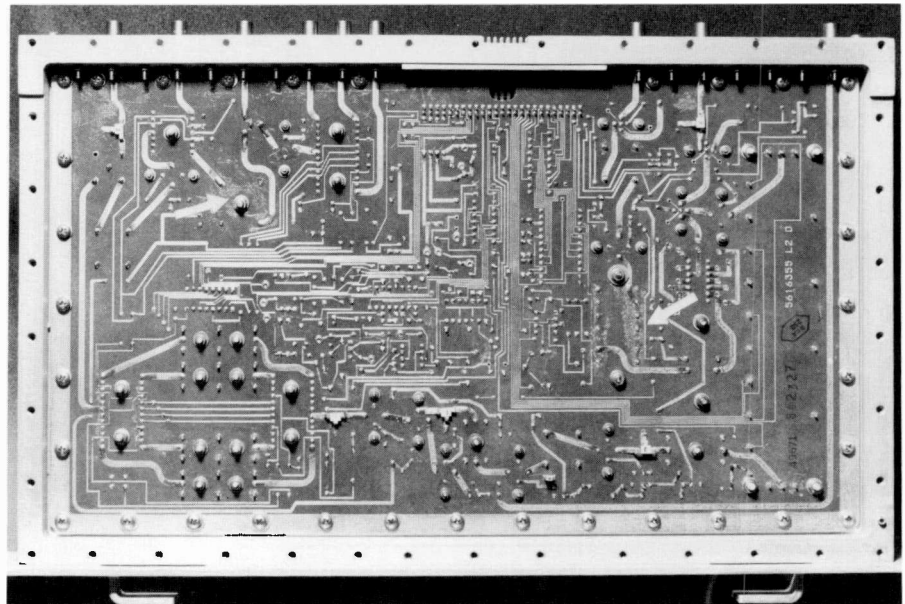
Engineering qualification assembly. Arrows indicate board areas with poor coating.
